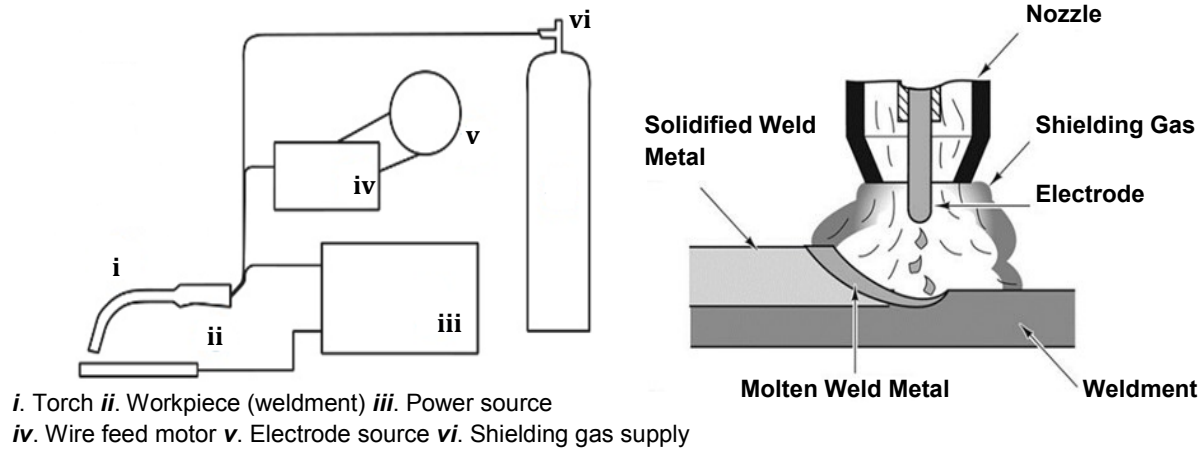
Schematic view indicating (a) setup of GMAW process and (b) arc configuration [86,203].
